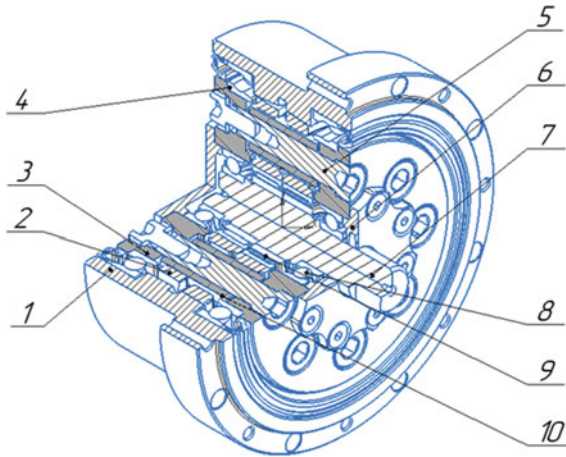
3D model of the POTCR 1—housing; 2—satellite; 3—output flange of the coupling; 4—bearing; 5—pin of the parallel crank mechanism; 6—cover; 7—eccentric shaft; 8—angular contact bearing; 9—eccentric shaft bearing; 10—pin bushing
